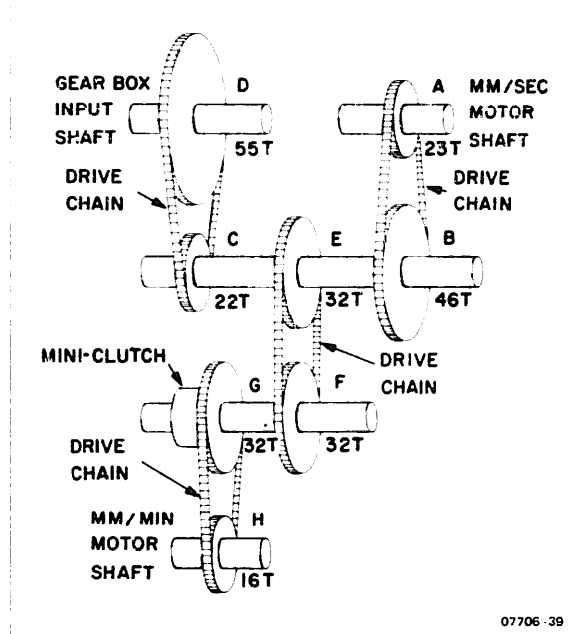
Power Flow Diagram From MM/SEC and MM/MIN Motors to Gearbox
